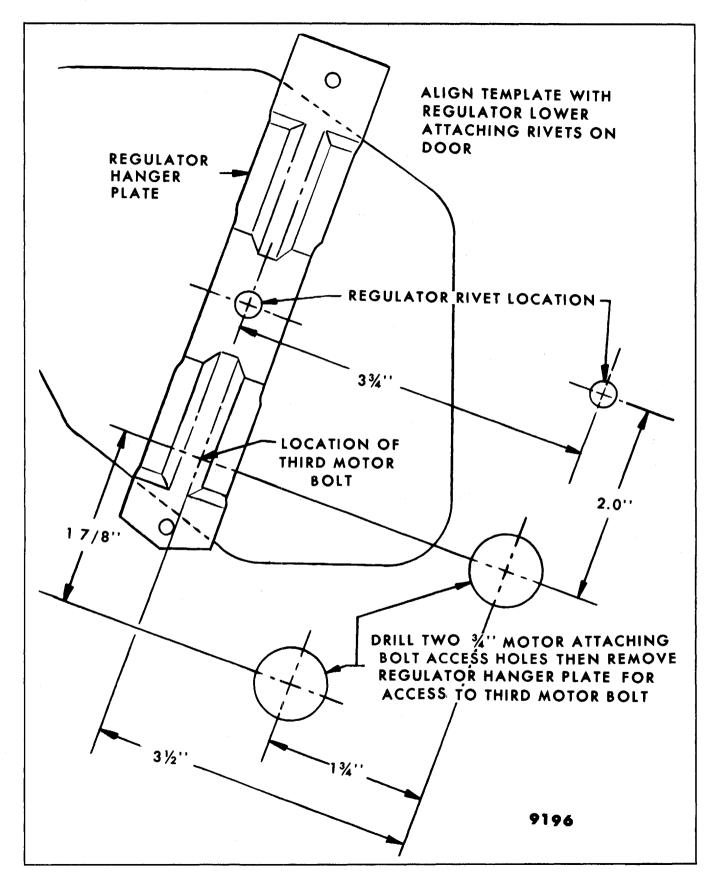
Window Regulator Reference Points for Locating Window Motor to Regulator Attaching Bolts - X Styles, Front Door
